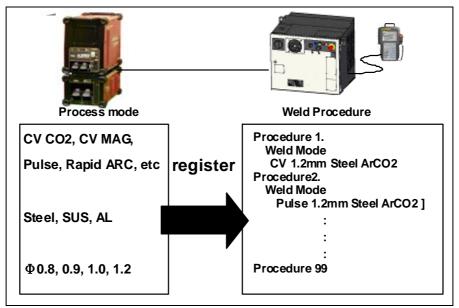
(c) Overview of process mode and Weld Procedure
